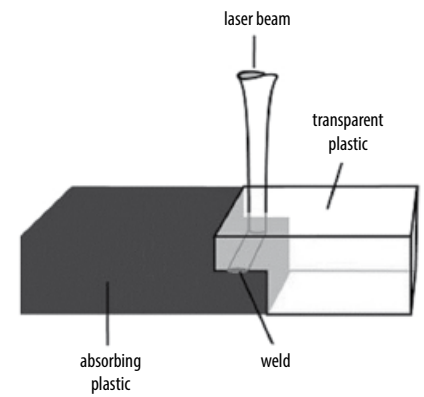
Principle of laser transmission welding (Source: Futonics Laser)
